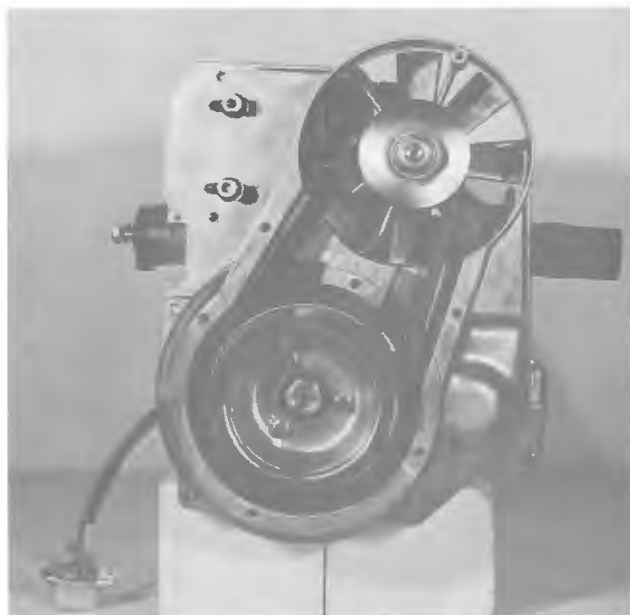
RECOIL STARTER AND IGNITION REMOVED
